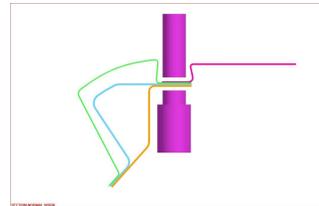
Weld samples of 1mm thick aluminum and 0.7 mm thick steel sheets
